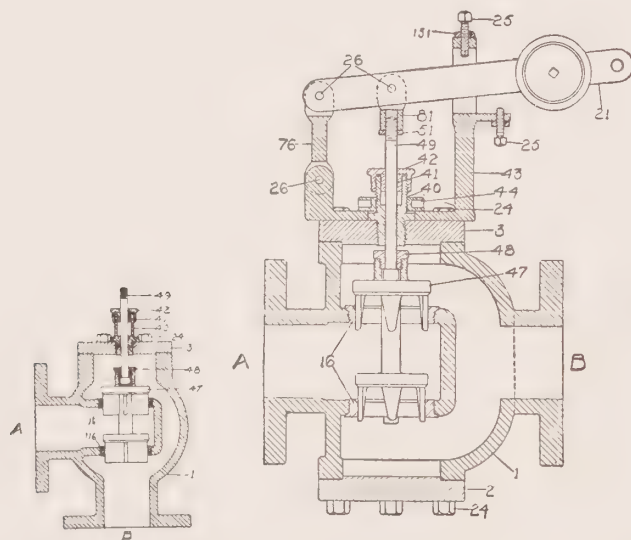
Balanced Valve. (This contains the double seated balanced valve No. 16, thus requiring very little pressure to open and close. Used with advantage where quick opening valves are necessary).
